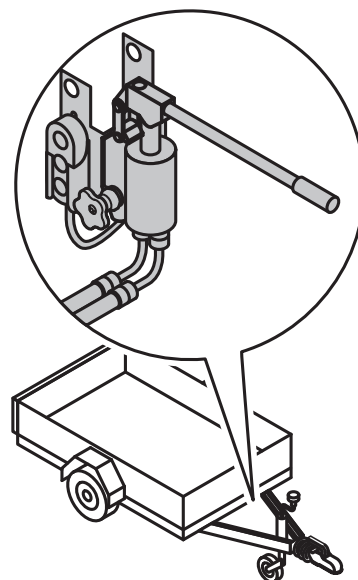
Basic version of electrohydraulic pump incl. emergency hand pump
